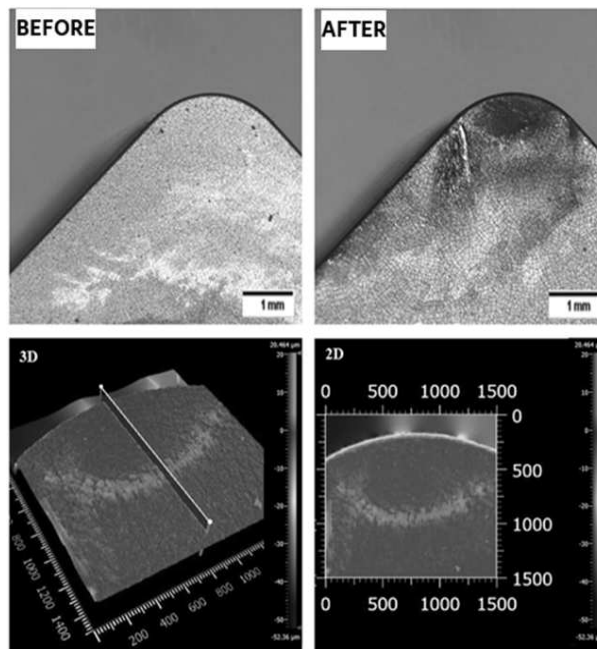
Plain rake face of cutting insert captured on optical profilometer before (left side) and after (right side) long-term machining
